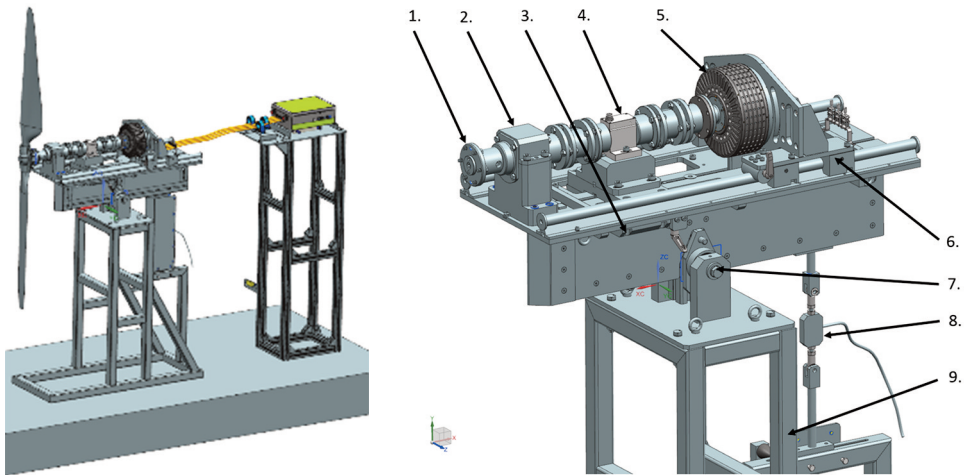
Propeller thrust test stand – visualisation [own elaboration].
